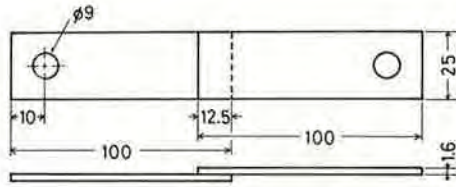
Dimension and shape of lap shear specimen. (mm)
